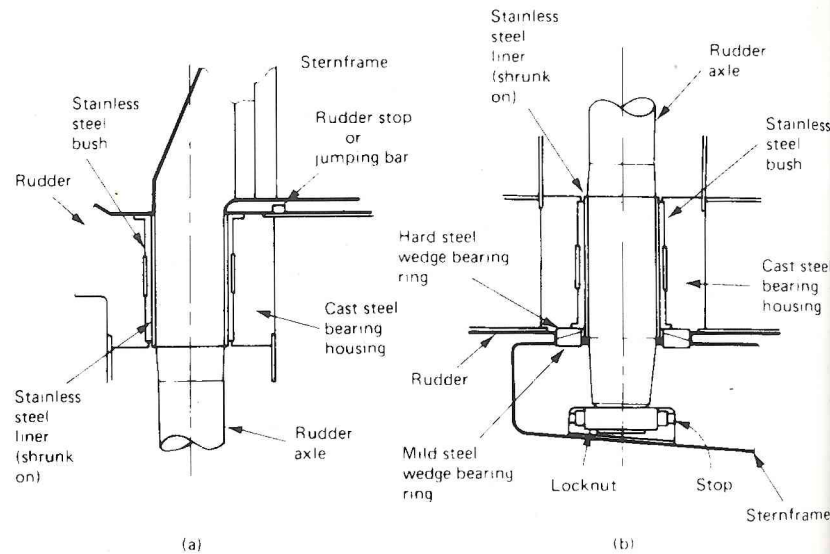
Axle-bearing arrangements: (a) upper bearing arrangement; (b) lower bearing arrangement
